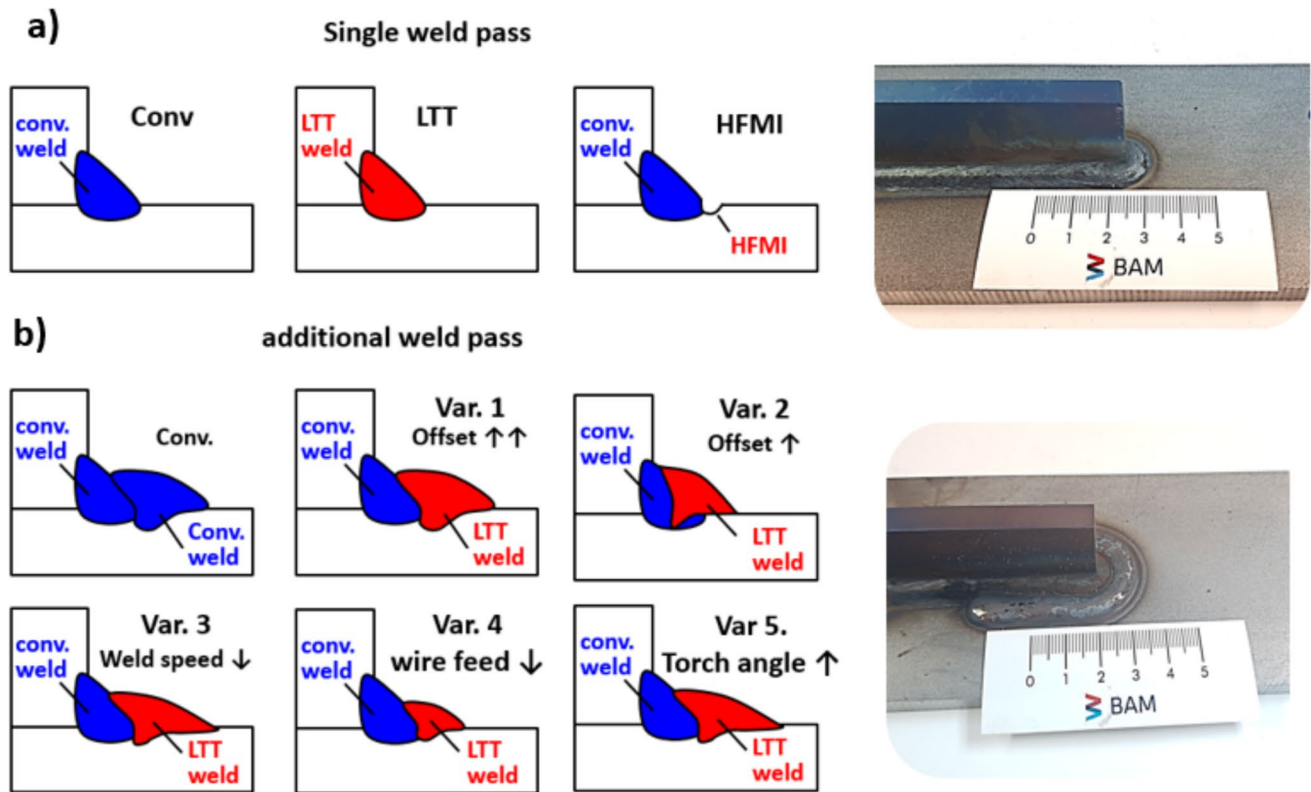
Test matrix of the nine sample series with the schematic cross-sections and an example of a single pass and b additional weld pass at the front layers
